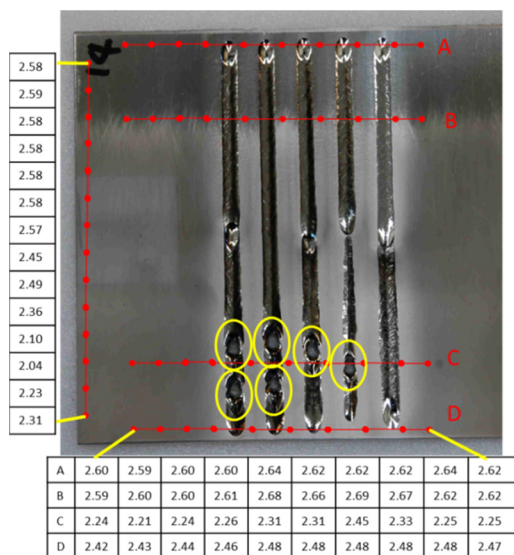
Welding hole due to dispersion of Nb plate thickness. The tables in this figure correspond to the thickness (unit: mm) of the plate at the red circles.
